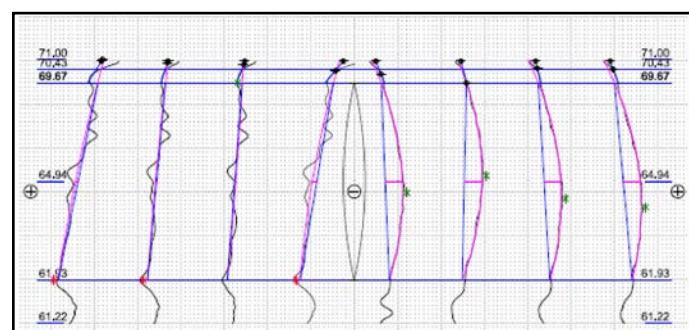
Left and right flank of four gear teeth on tested gear before testing.
